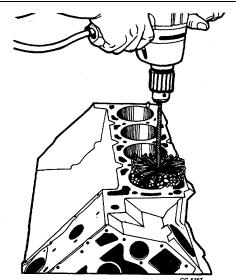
Deglazing Cylinder Wall Surface Using SE-2314-5 Glaze Breaker Brush and Electric Drill
